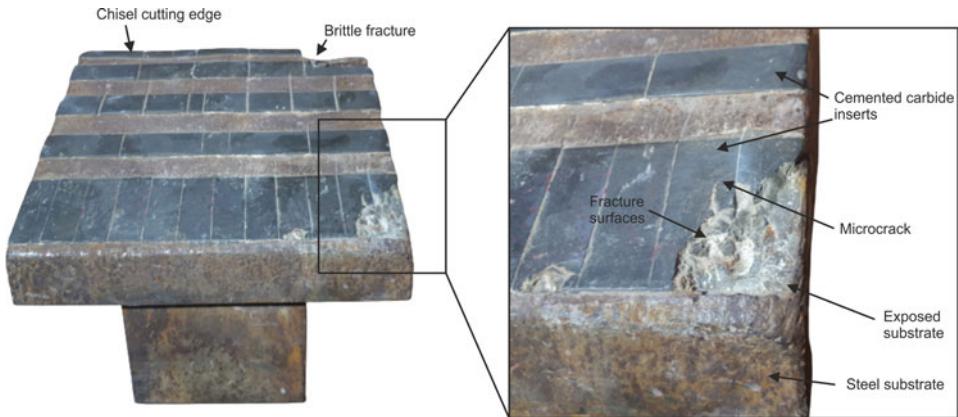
Surface fatigue on the cemented carbide inserts of a chisel tool
